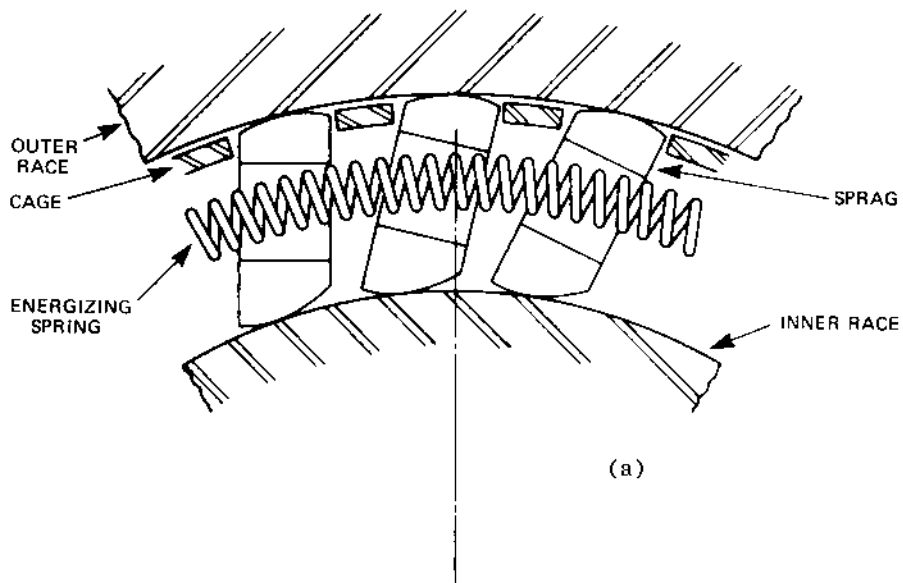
Modified sprag design for closer packing. (Courtesy Georg Muller of America, Inc., Schaumburg IL.)
